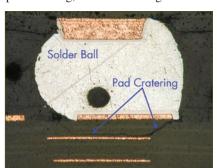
| The cross-section photo shows pad cratering on a lead-free solder joint. Stiffer lead-free solders and more brittle PWB materials are leading to an increased risk of pad cratering on lead-free boards.
